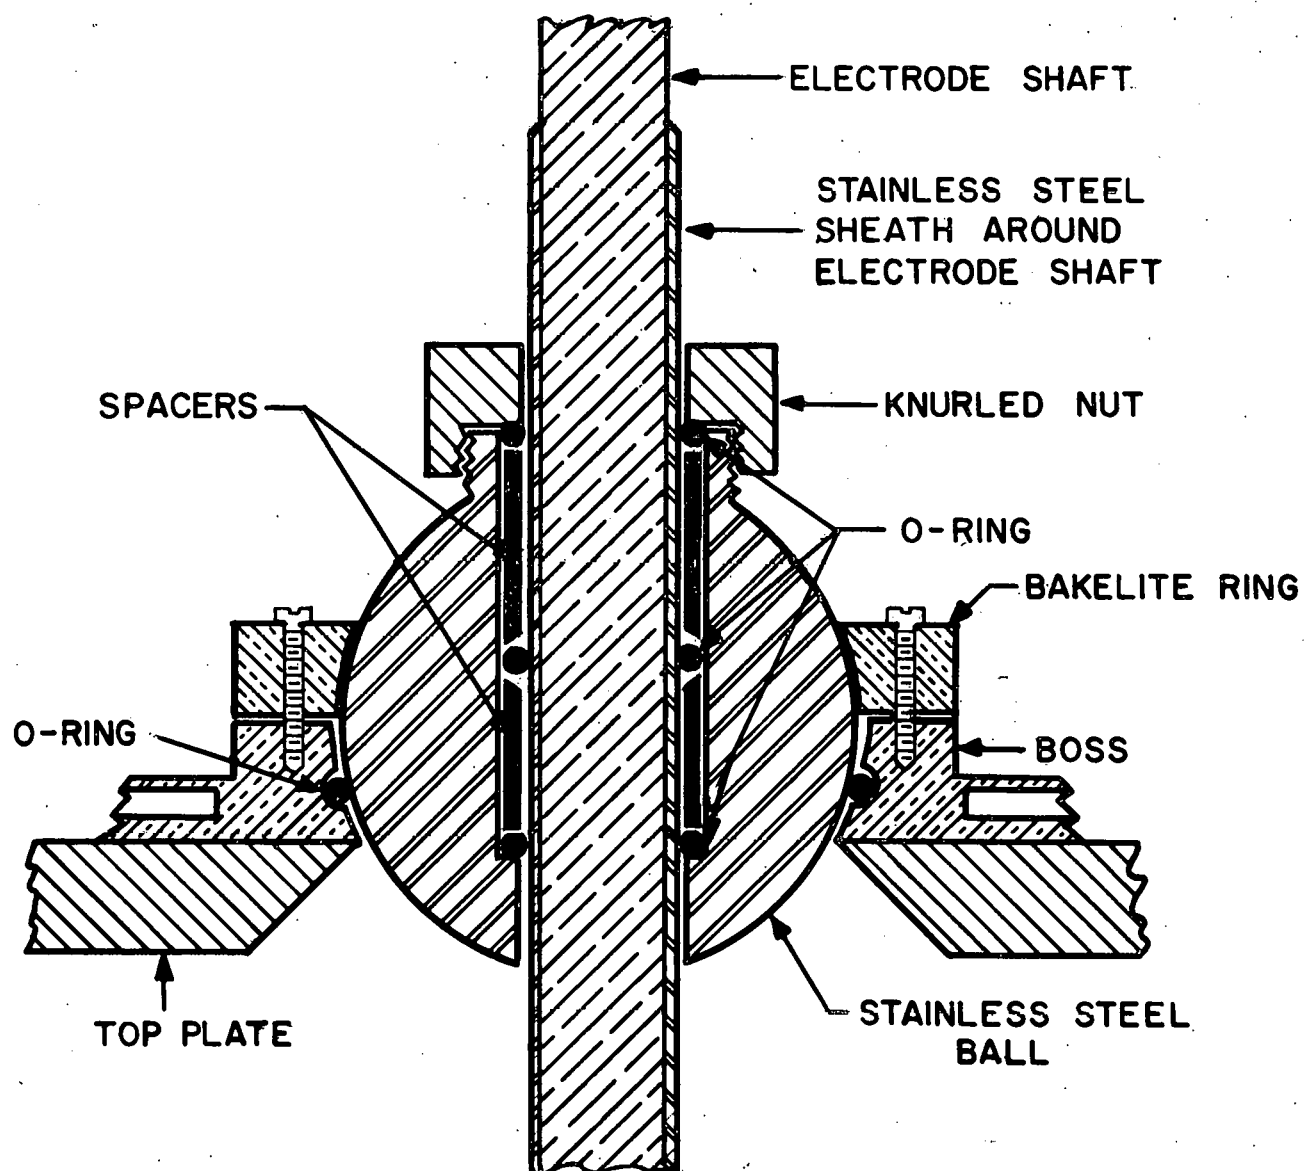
Details of the Ball and Movable Shaft Mechanism.
